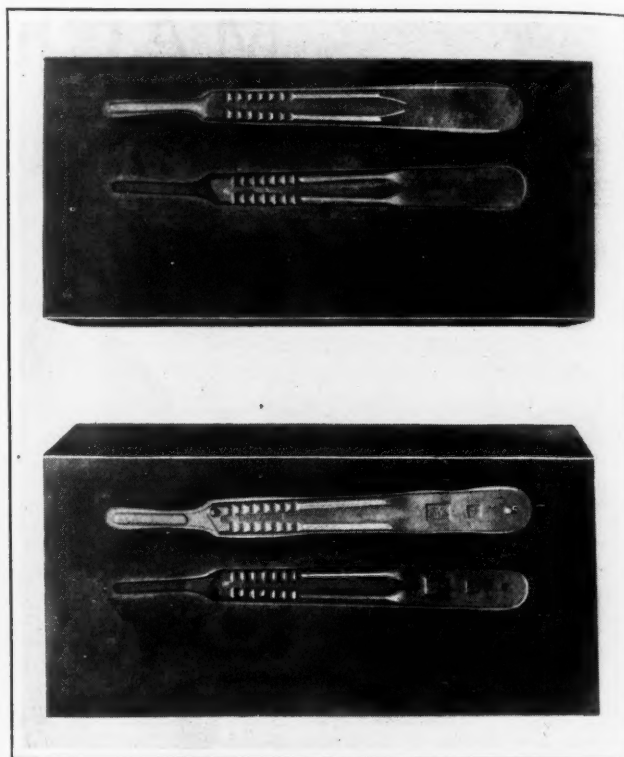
Upper and Lower Dies and Sample Forgings, showing the Side formed by Each Die
